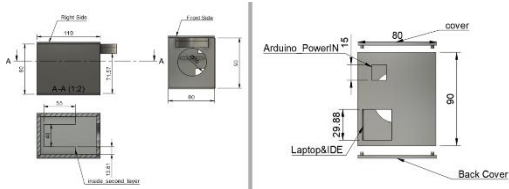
Base Design of Robotic Arm Components (all dimensions in mm)
